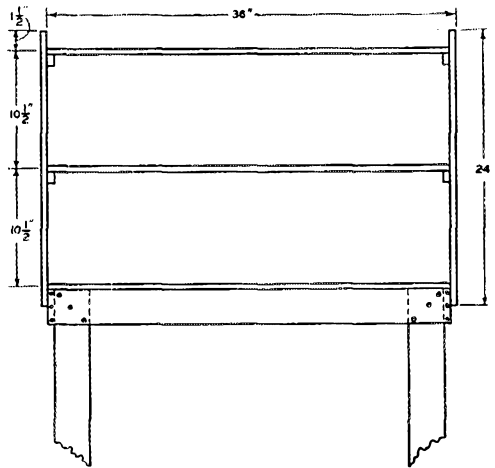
Sketch showing dimensions of operating table and method of assembly.
